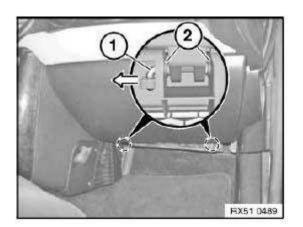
Identifying Catches, Special Tool 00 9 340 And Button Courtesy of BMW OF NORTH AMERICA, INC.
